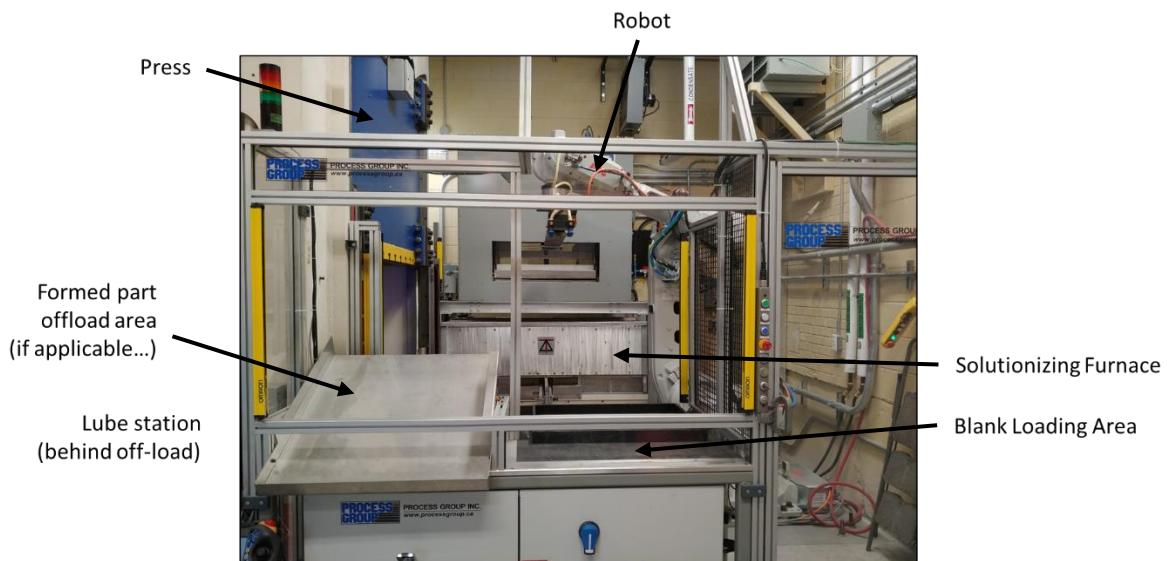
Fast forming set up with press robotic arm and solutionizing furnace [130].
